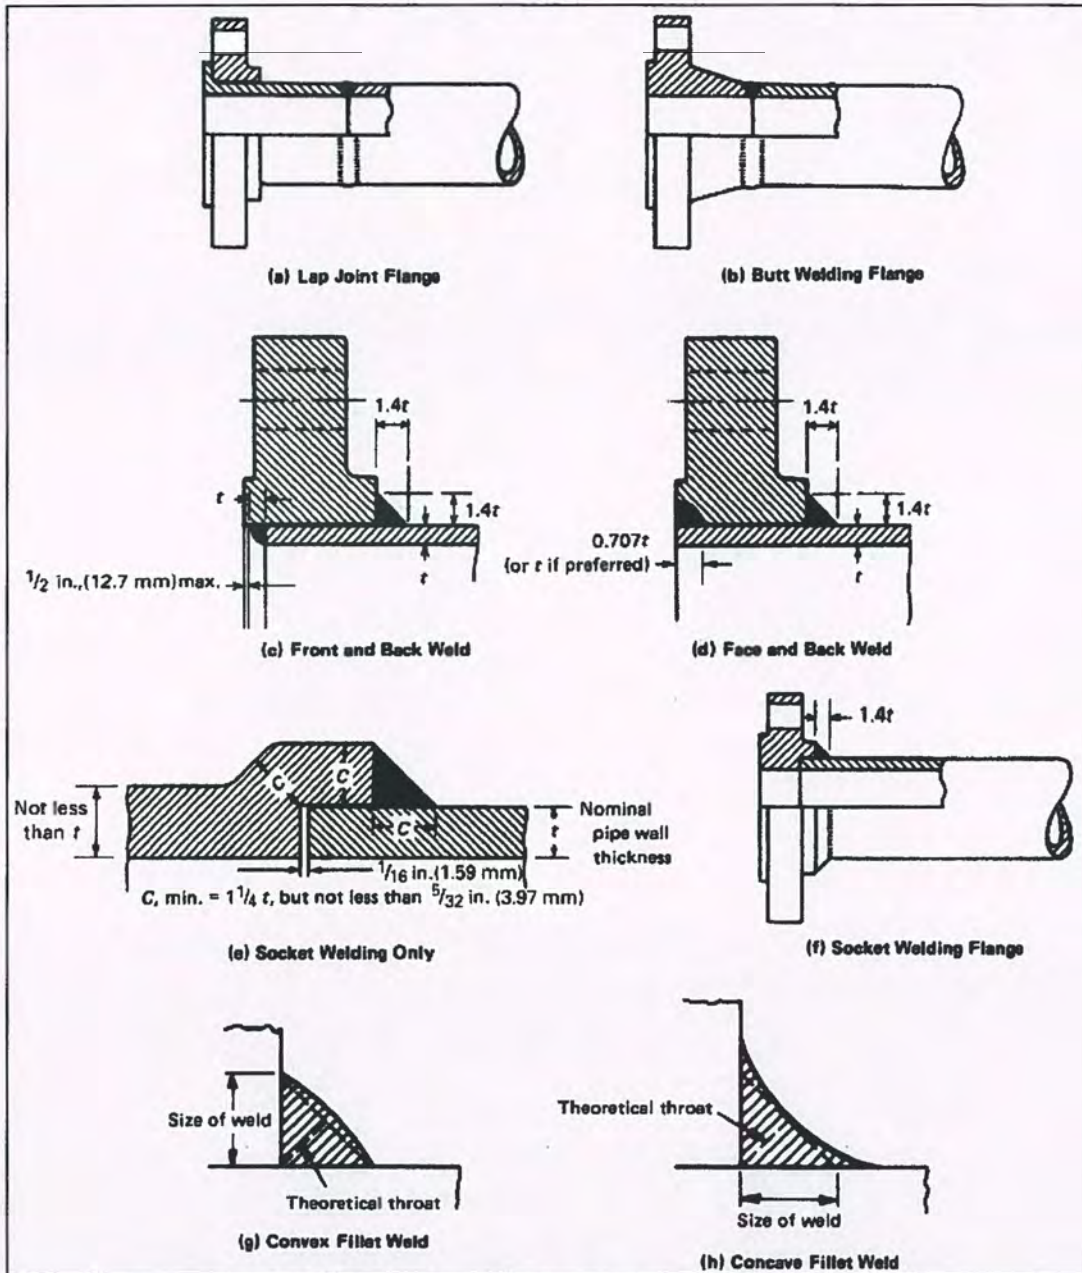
Recommended Attachment Details for Flanges and Socket Welds
